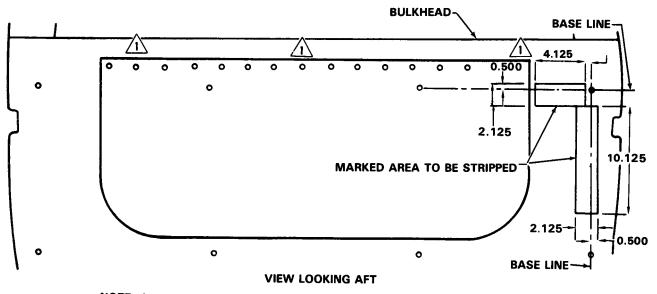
Crew and Passenger Seat Belt Installation (Sheet 2)
